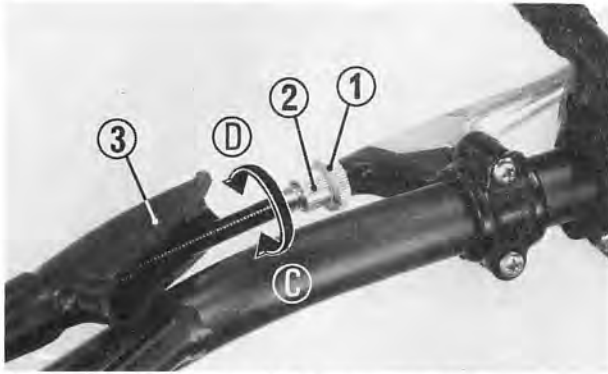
(1) Lock nut (2) Adjuster (3) Dust cover
